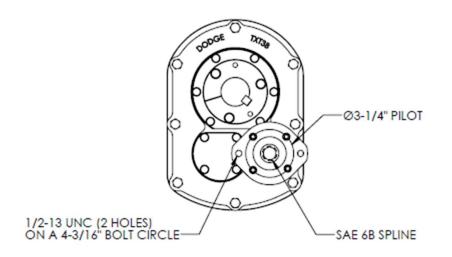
SAE "A" Mounting Flange -2 Bolt (1/2" bolts) with SAE 6B spline
